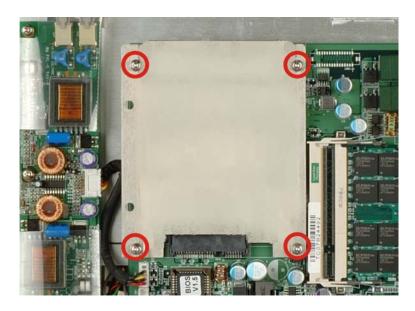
AFL-915 Hard Drive Bracket Retention Screws
